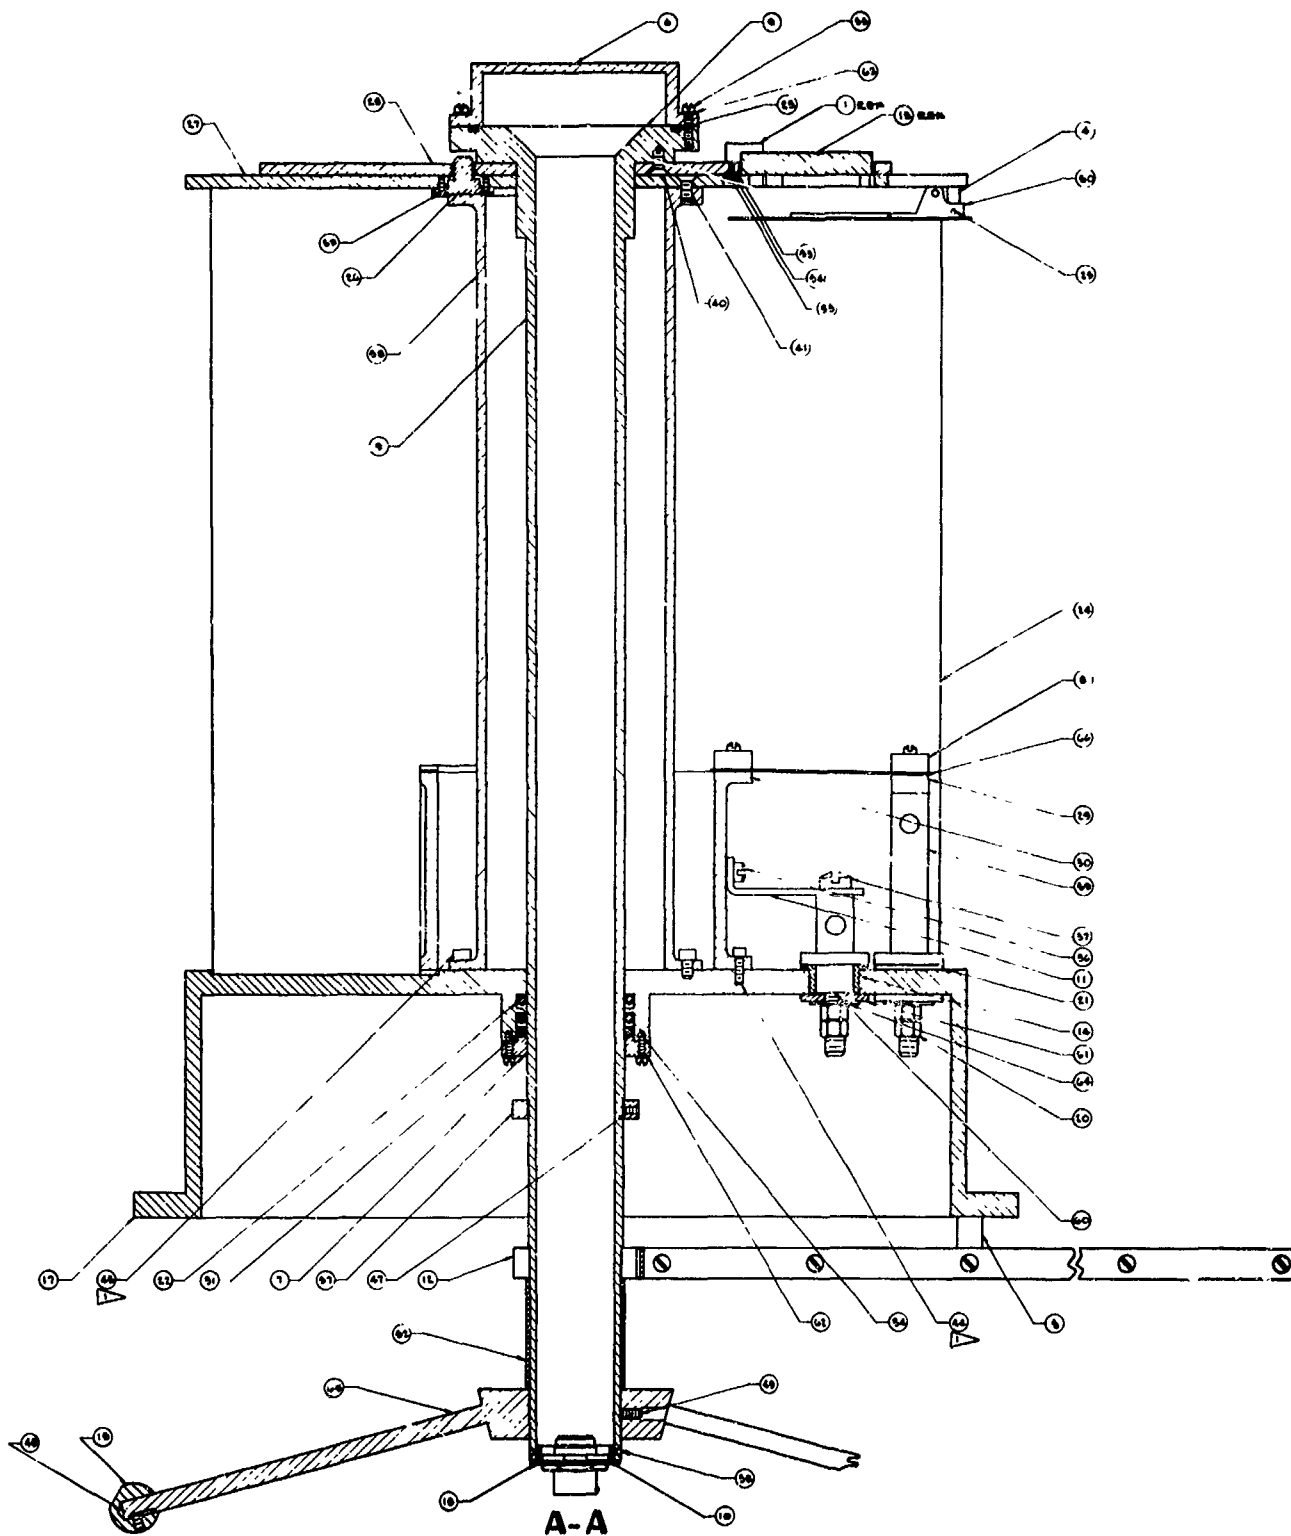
Thin-film microcircuit deposition unit assembly drawing, sheet 1 of 2.
